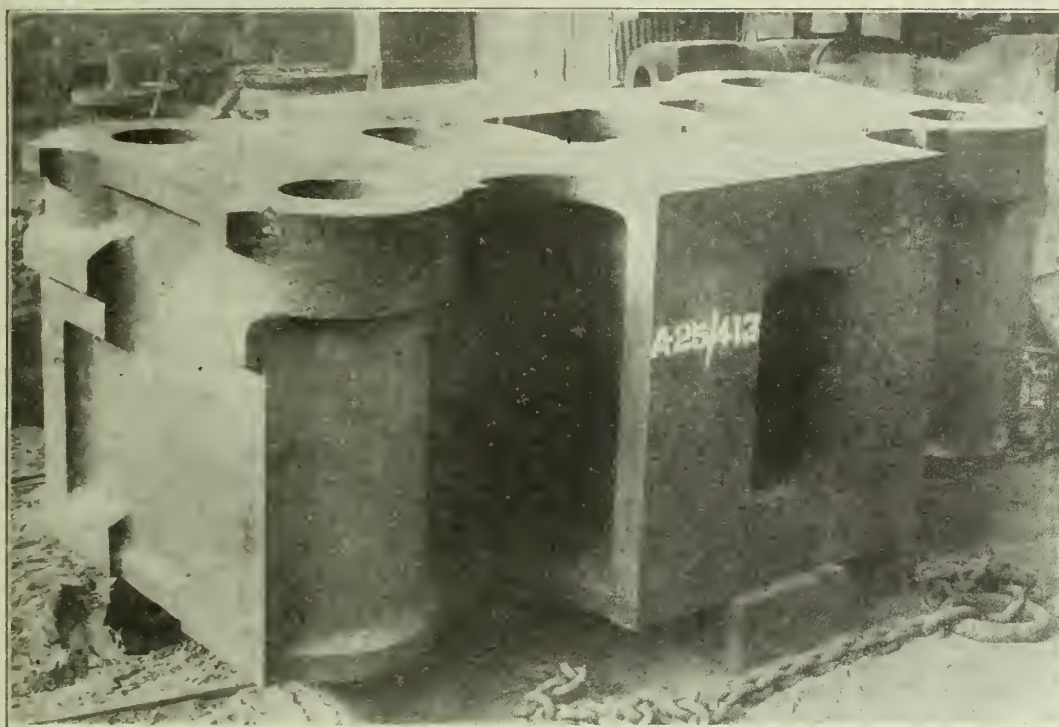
THE BASE PLATE CASTING READY FOR ANNEALING.
